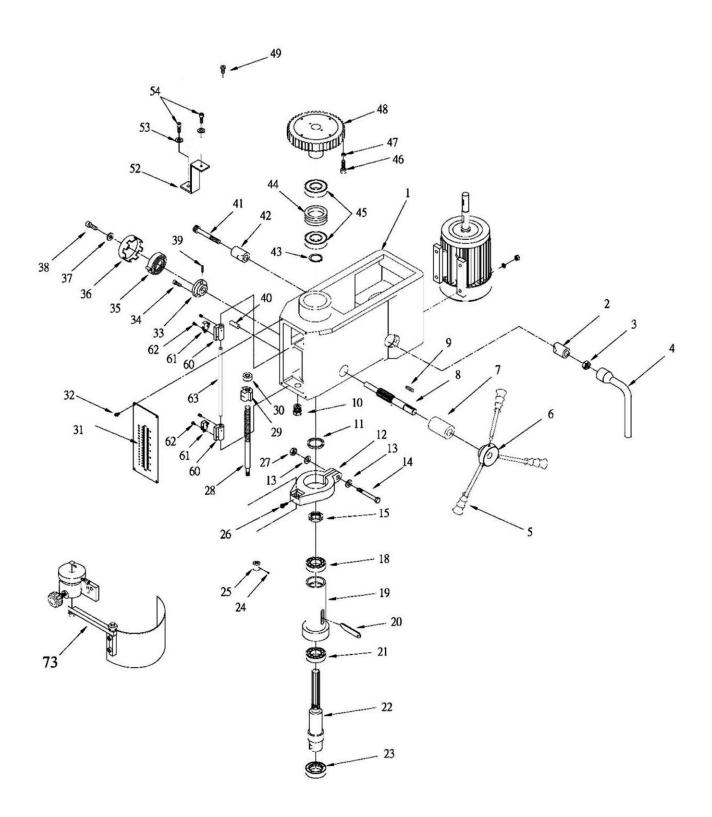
Replacement Parts Illustration for Head and Spindle Assembly
